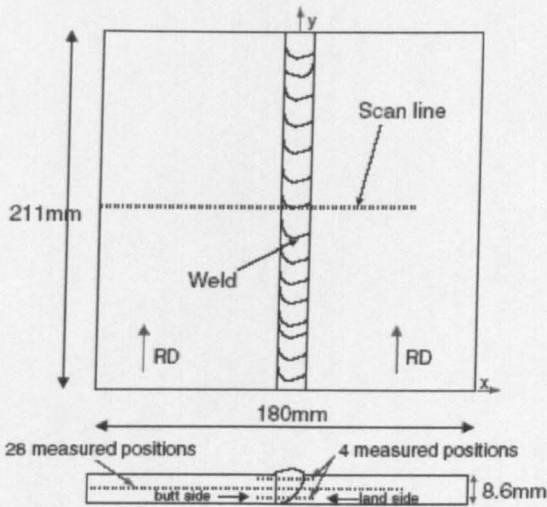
Schematic of the weld and experimental setup [36].
